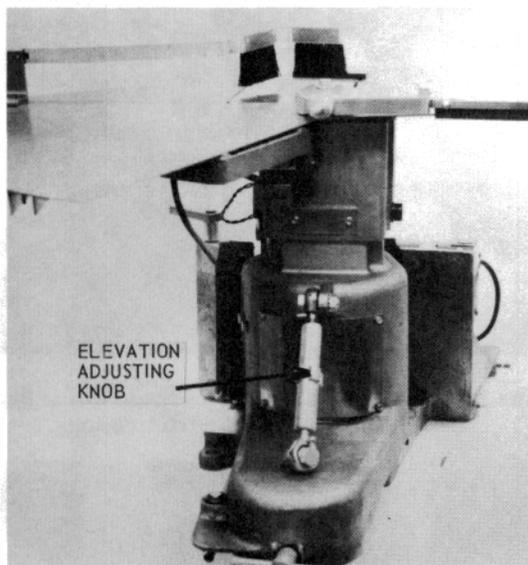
Elevation Adjusting Knob Assembly Disconnected
